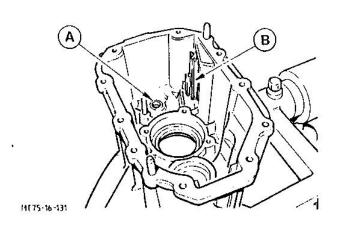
A - Main selector shaft ball sleeve B - Selector gate
